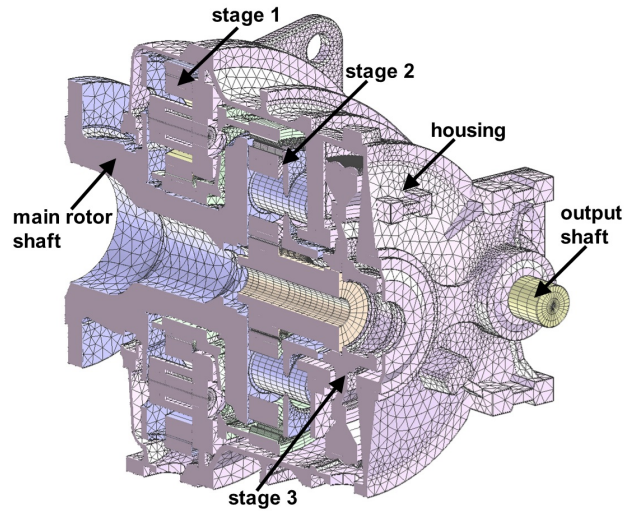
Cutaway view of the finite element model of the FC5500 gear train.
